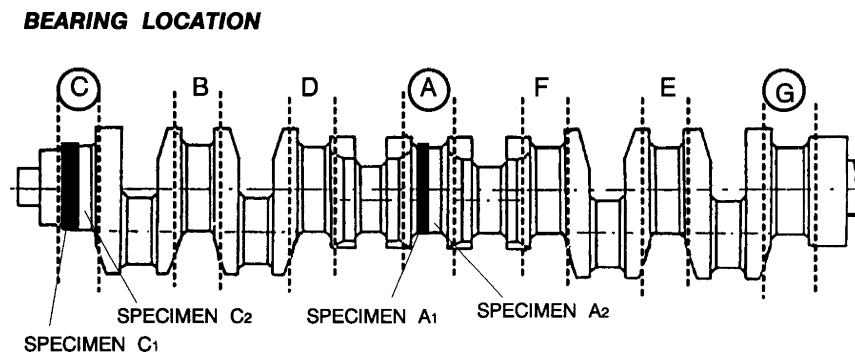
Schematic presentation of crankshaft and marking main bearing locations.
